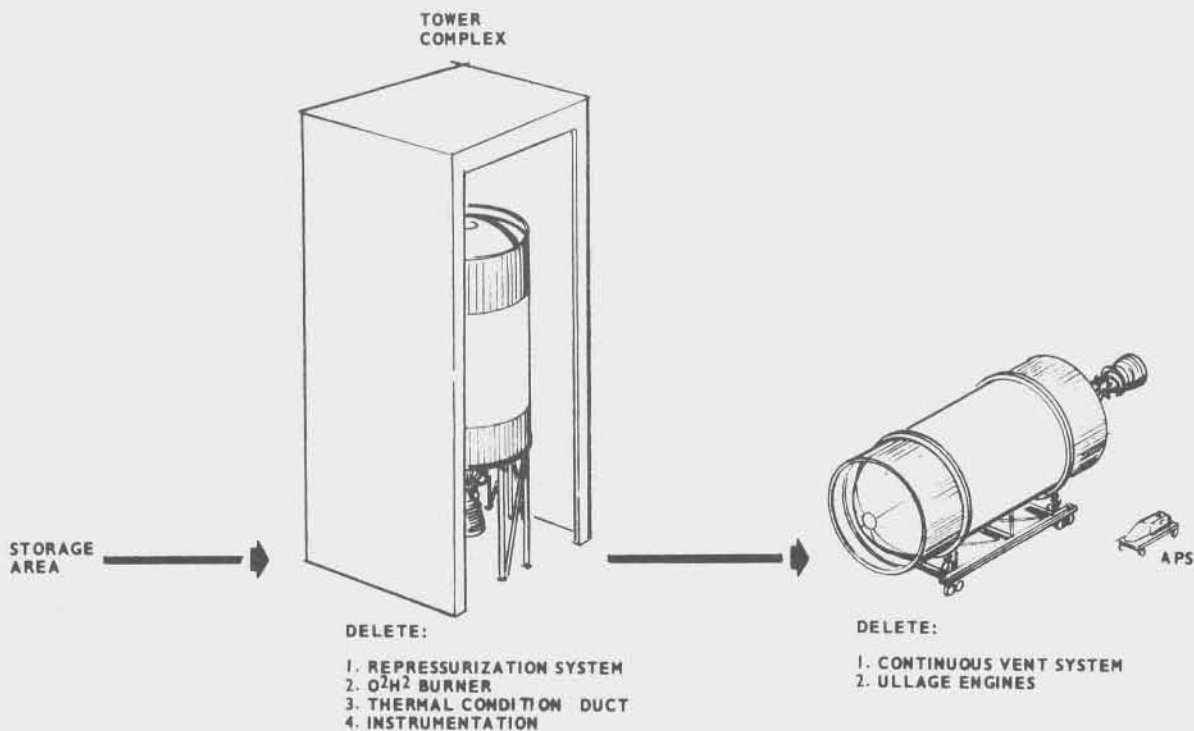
Manufacturing Plan, Retrofit INT-20/S-IVB Stage
